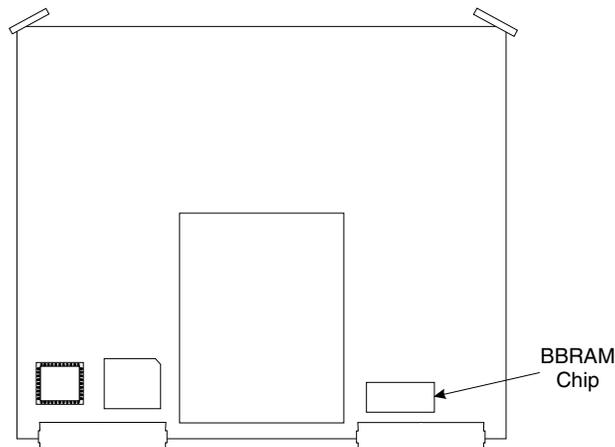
Location of BBRAM Chip on the A9 PCB
